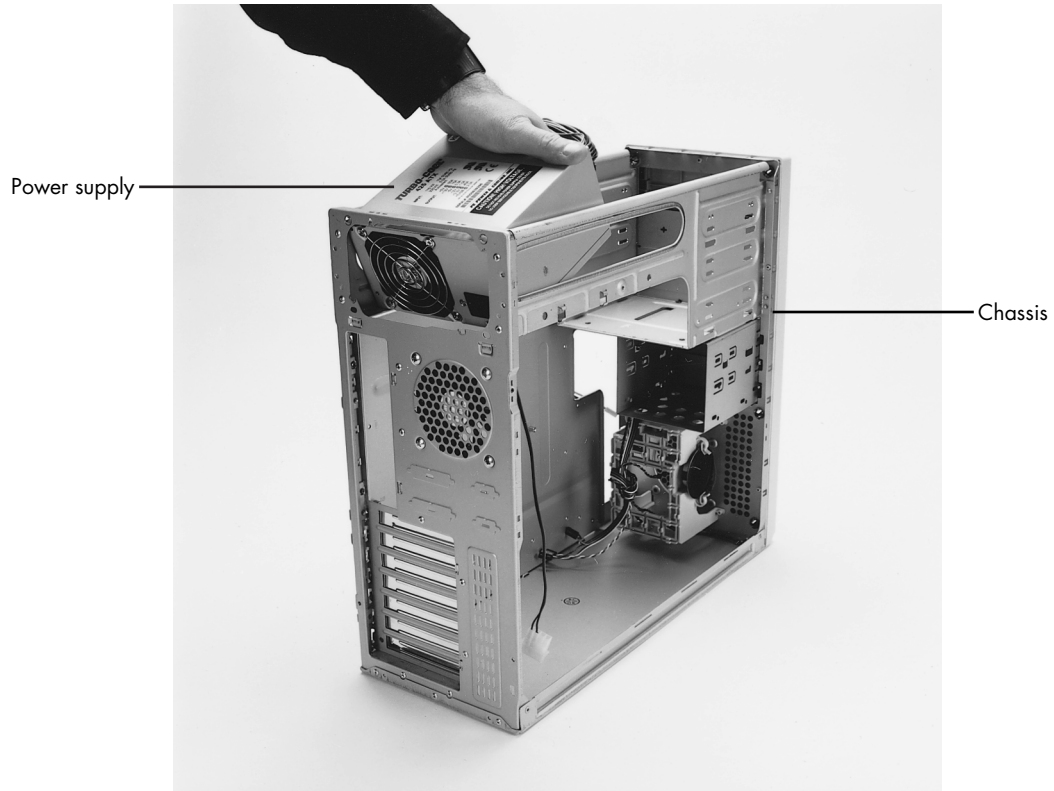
Installing the power supply into the chassis. *Case and power supply courtesy of PC Power & Cooling, Inc.
